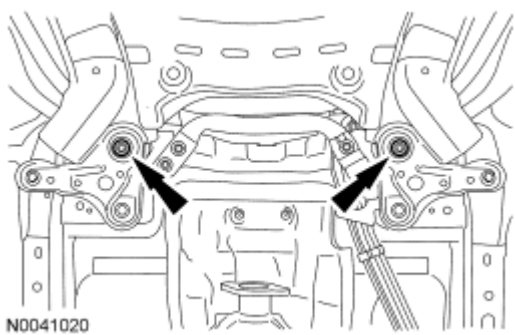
Locating Power Steering Cooler Tube Bolts
